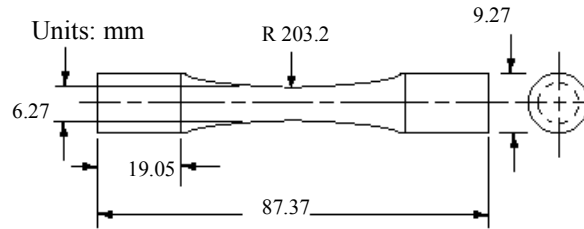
Geometry and Dimensions of Hourglass, Circular Cross-section Fatigue Life Test Specimens.
